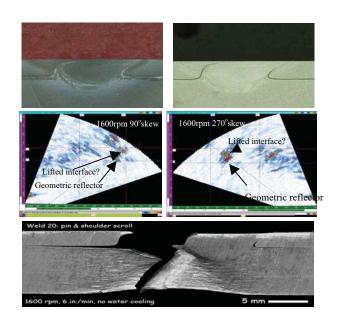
Top left: 1- to 2-minute HF etch of a cross-section from the 1600 rpm Pin and Shoulder Scroll tool FSP without cooling. Top right: 60 minute NaOH etch of a cross-secton from the 1600 rpm Pin and Shoulder Scroll tool without cooling. Center: PAUT of the 1600 rpm Pin and Shoulder Scroll tool FSP without cooling noting the Geometric Reflector and possible lifted interface. Bottom: Tensile test of the 1600 rpm Pin and Shoulder Scroll tool FSP. Failure occurred at the left-hand lifted interface.
